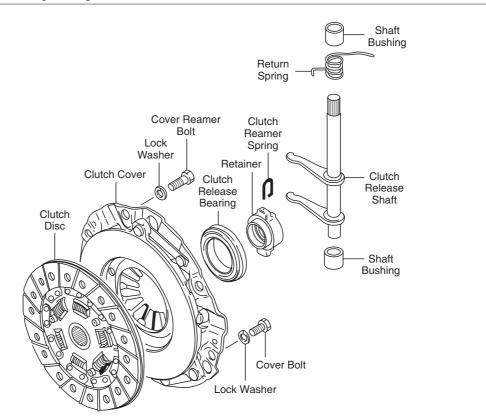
Clutch Component (Courtesy: Maruti Udyog Ltd.)
